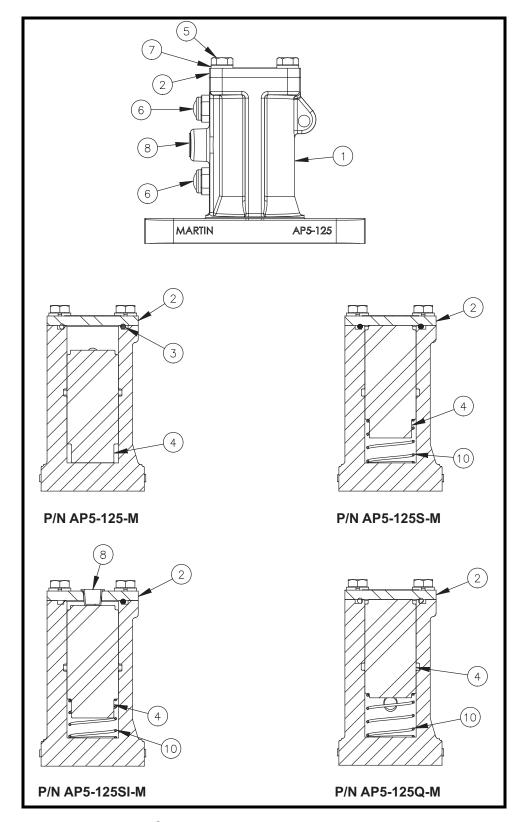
Martin[®] AP5 Series Piston Vibrator, P/N AP5-125XX-X
